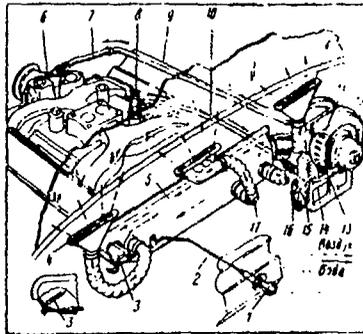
ZIL-130 and ZIL-131 Cabin Heater: 1, lever controlling heater channel valve; 2, line; 3, heater channel valve forcing air to defroster (shown in open position); 4, defroster nozzle; 5, channel; 6, water pump; 7, hose draining water from heater; 8, valve; 9, cylinder head valve cover; 10, line carrying water to heater; 11, centrifugal fan; 12, electric motor; 13, radiator; 14, fan body valve; 15, valve locating spring; 16, valve control lever; 17, defroster hose
